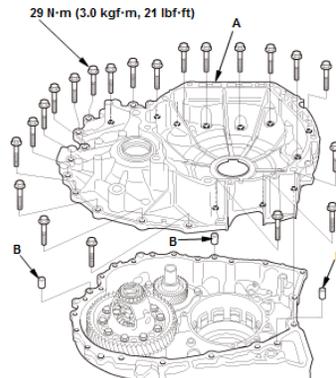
Torque Converter Housing With Torque Specifications (2WD)
